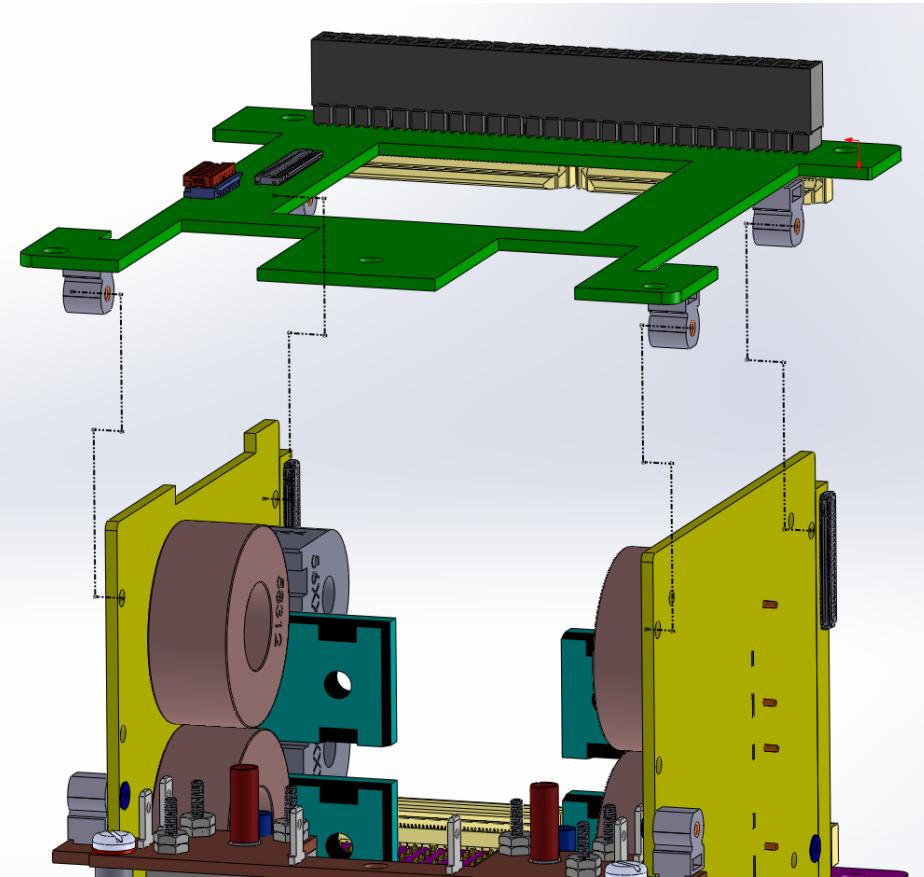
Line up the Right Angle Connectors on the Top Board with the holes shown on BPL and BPR.
